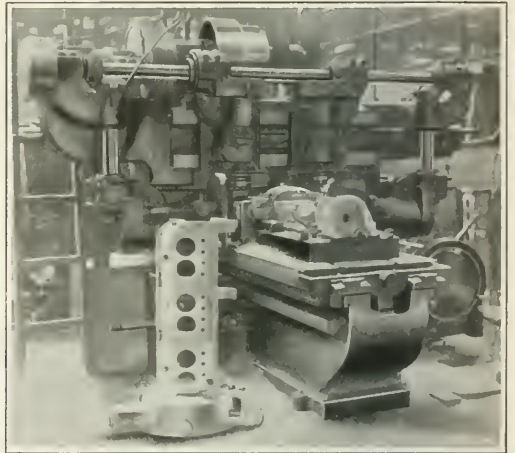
Small Ingersoll Milling Machine used for facing Suspension Arms, Starter Box Seat and Accelerator Pad
